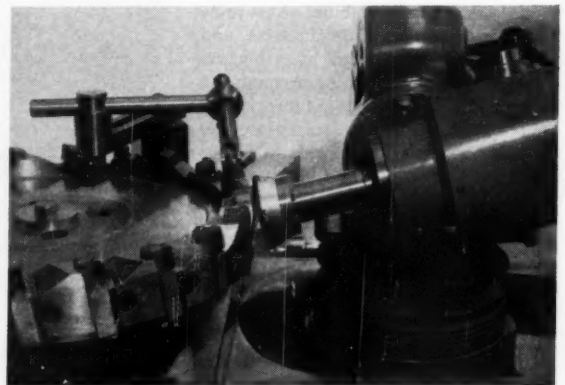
NV Nederlandshe Machinefabriek "Artillerie-Inrichtingen" form and tool grinder
